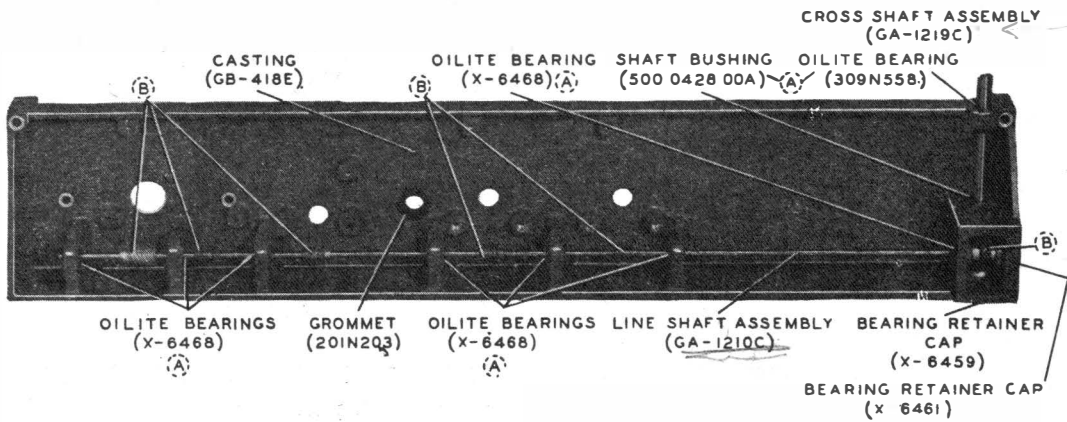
R-F Unit Autotune Assembly (Heads Removed)
